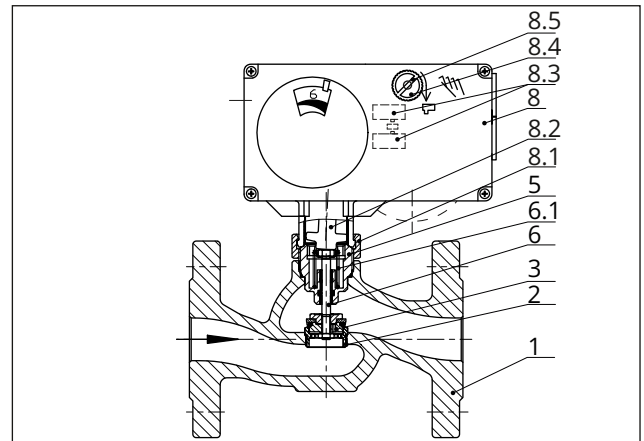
Type 3213/5724-3 · Type 3213/5724-8
